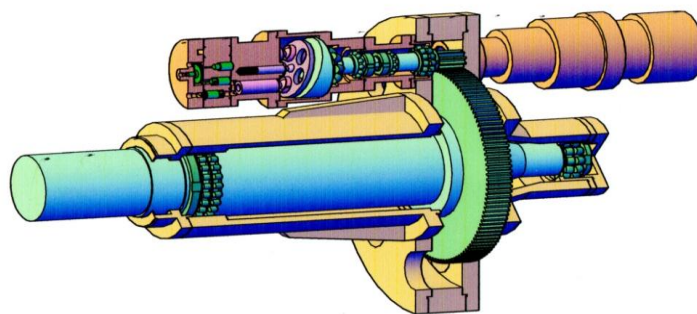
Geared Piston Pump set for Hybrid H.S.T. for 1MW Conversion
